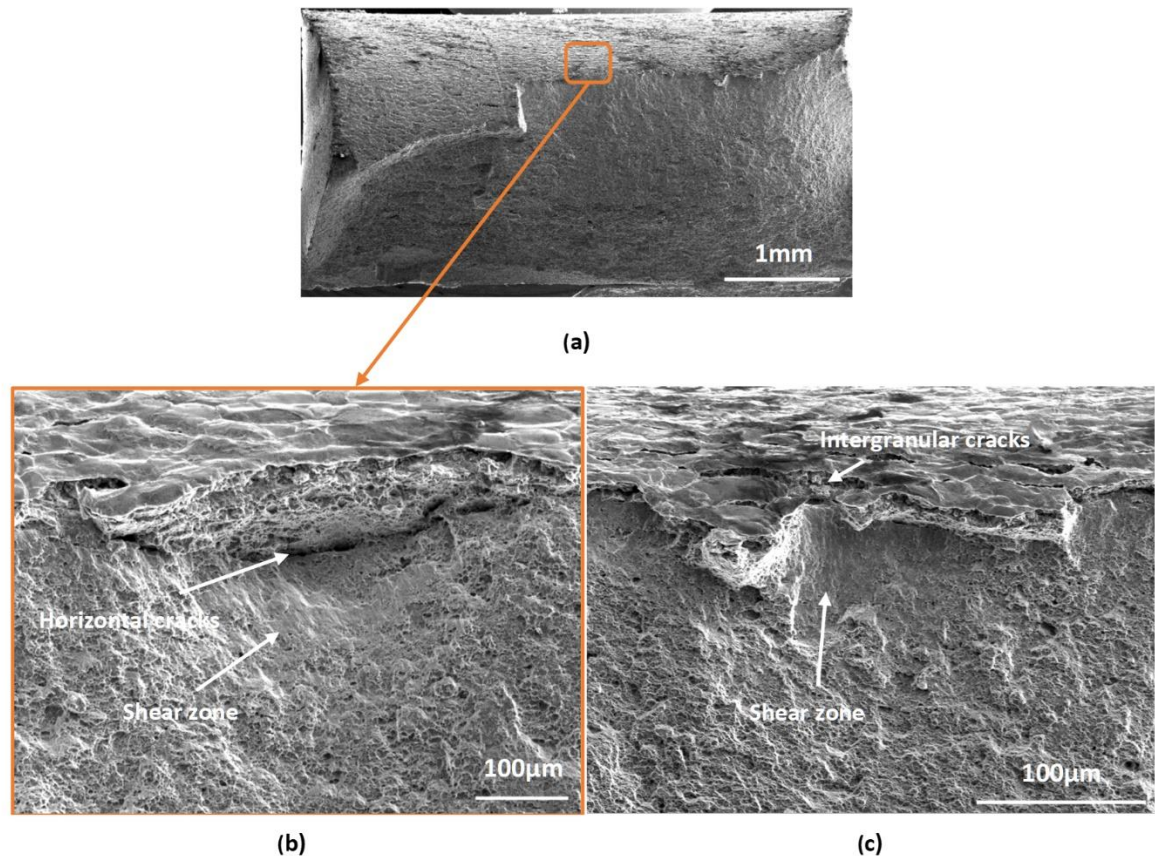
The fracture surface of the DP1000 sample with 10 μm thick internal oxidation layer. The positions of intergranular cracks, long horizontal cracks and shear zones are labelled. Image (a) is an overview of the fracture surface, (b) and (c) are taken at higher magnification near the sample surface.
